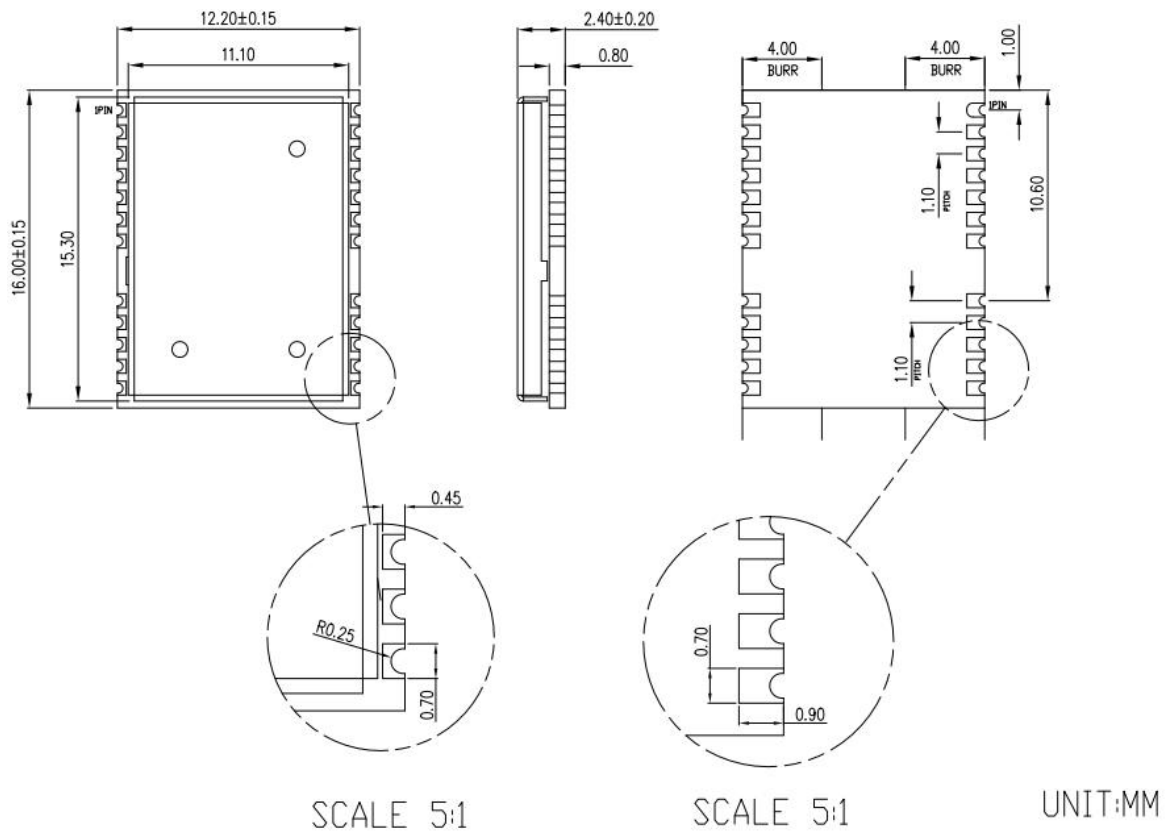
SIM68AT mechanical dimensions (Unit: mm)
